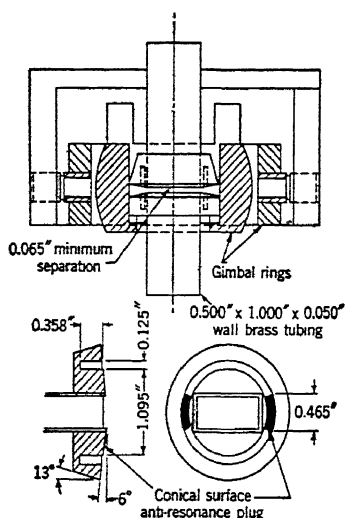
Universal Joint (Courtesy McGraw-Hill Book Co.)
